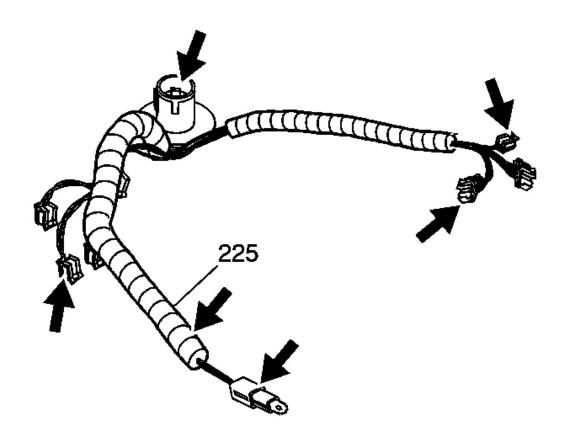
View Of Wiring Harness Assembly Courtesy of GENERAL MOTORS CORP.
